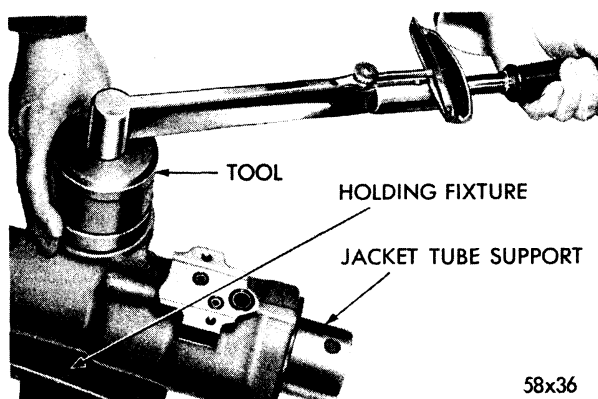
Removing or Installing Gear Shaft Cover Nut with Tool C-3633
